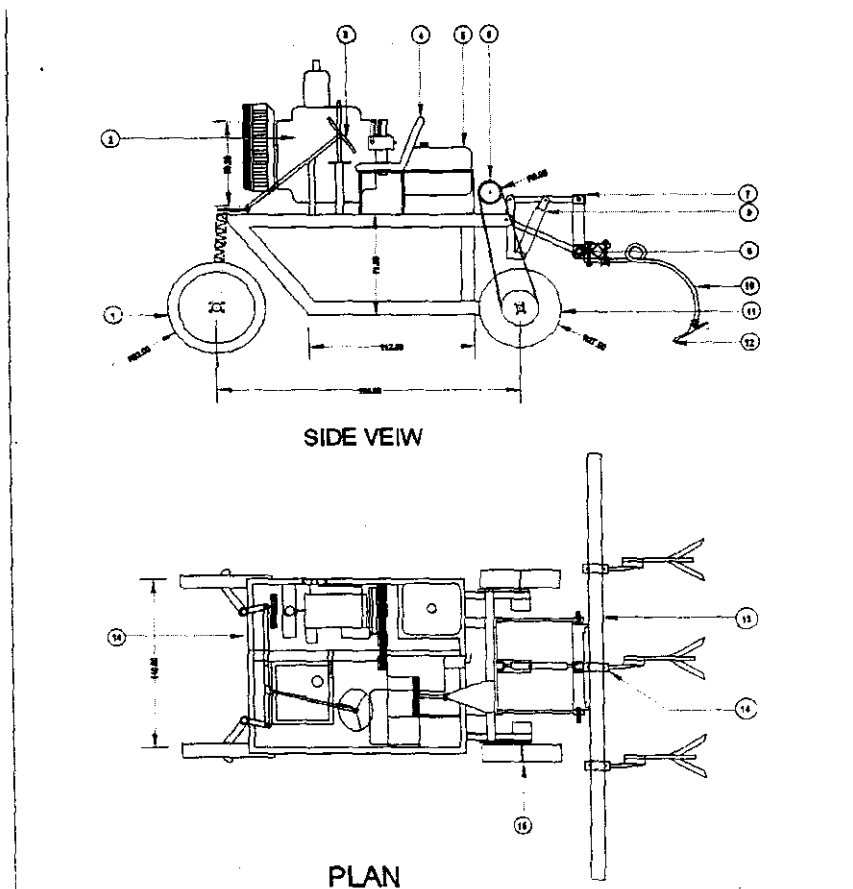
Side view and plan of the modified tractor mounting inter row cultivator.
